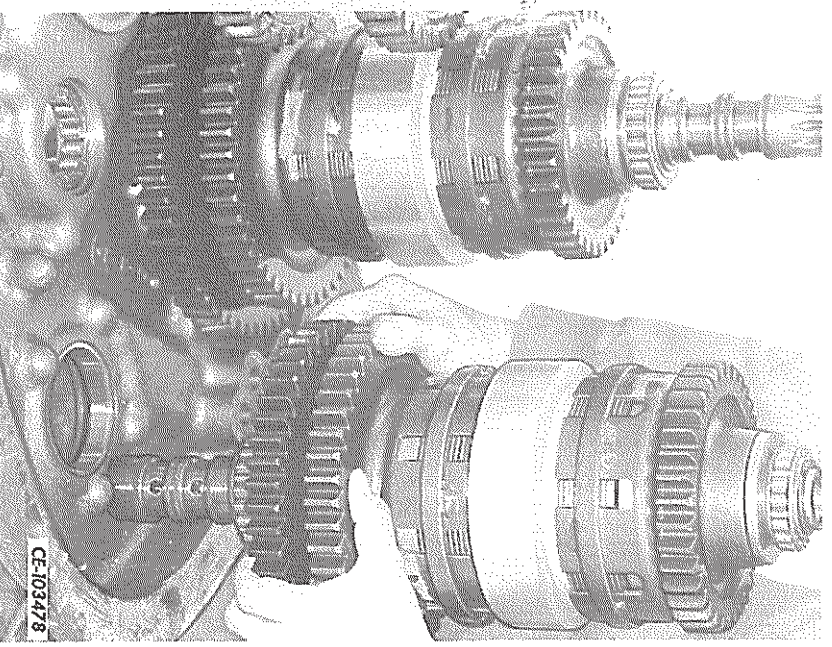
Removing the Reverse Clutch Shaft Assembly
